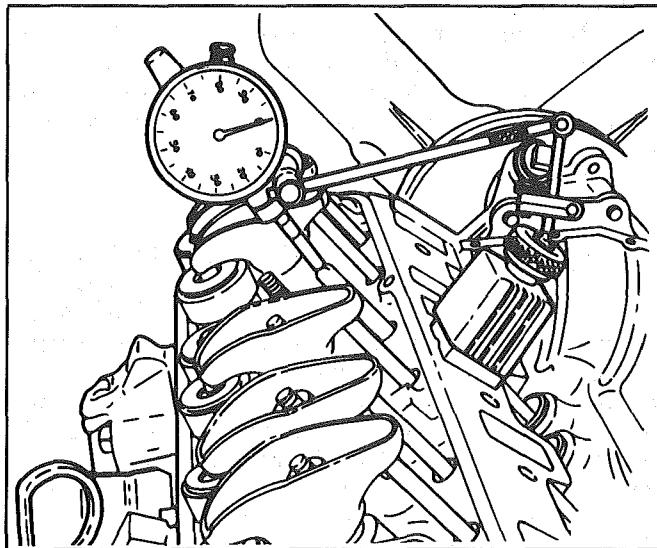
A3-29 Measuring Camshaft Lobe Lift
